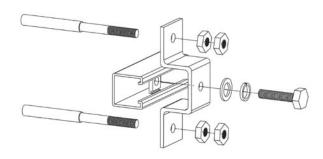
Cell clamp to side rail assembly (Refer to Support Rail Assembly)
